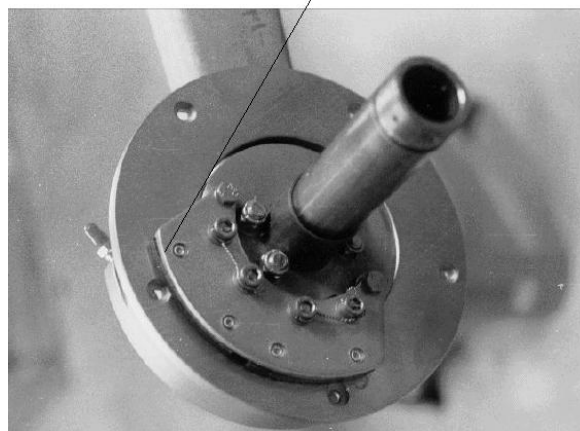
To get the calipers to fit on some of the earlier batches of wheels you will have to machine the rims or grind away some of the brake pad plate (or both).
